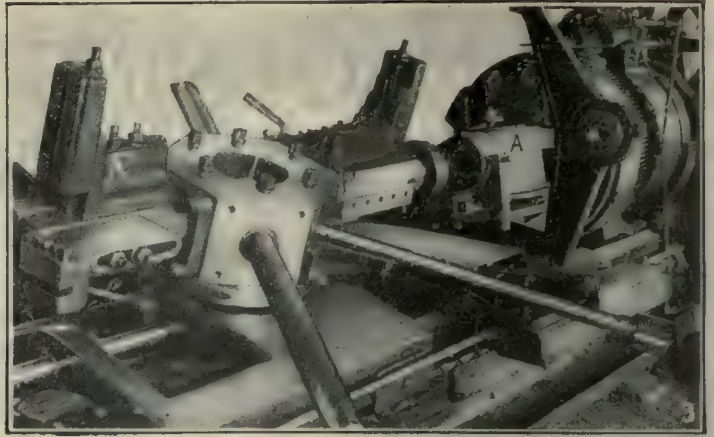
BRACKET FIXTURE FOR FINISHING CYLINDER SEAT
